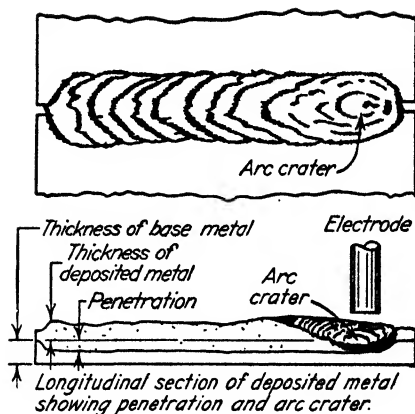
Weld penetration and arc crater. From Gilbert D. Fish, *Arc-Welded Steel Frame Structures*, McGraw-Hill Book Company.
